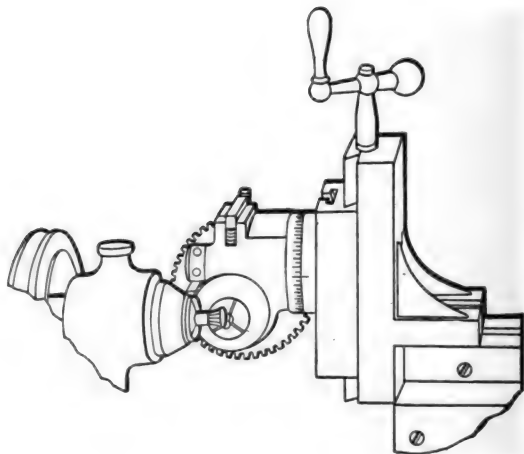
A milling attachment for a bench lathe. This attachment has an index plate.
